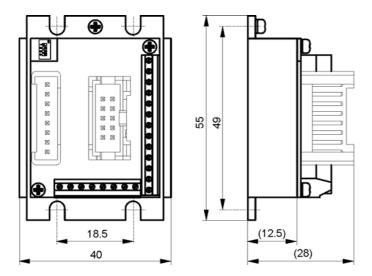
Dimensions EPOS 24/1 for EC 16/EC 22 motors 302267
